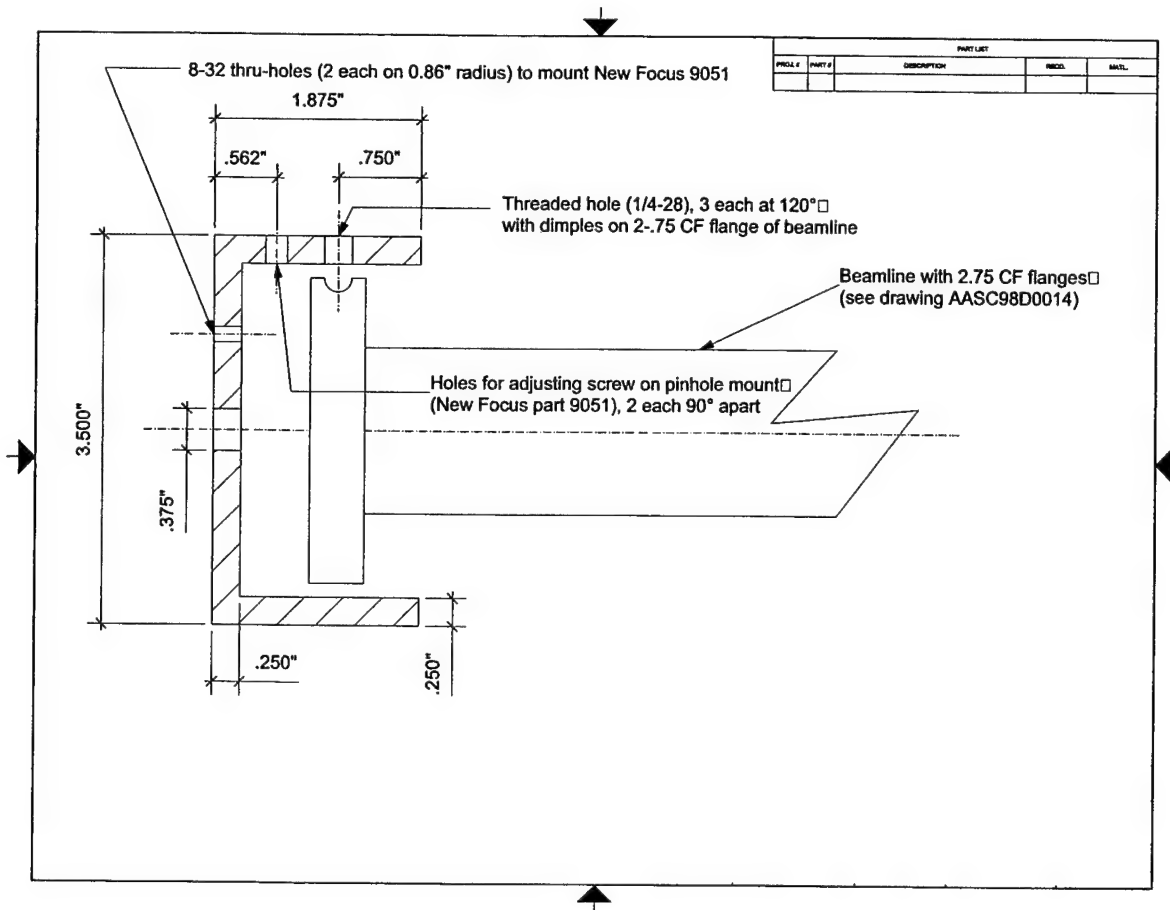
Schematic drawing showing the pinhole mount at the end of the 2.75" conflat flange.
